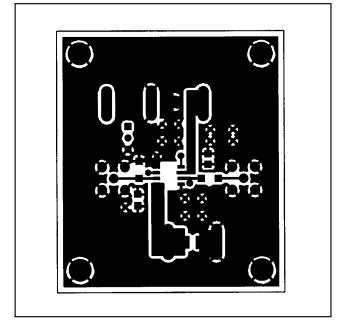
MAX477 EV Kit PC Board Layout—Component Side
